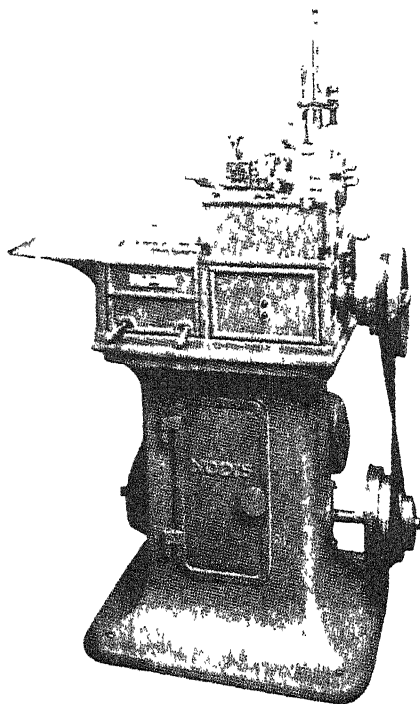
A CONTEMPORARY TYPE-CASTING MACHINE.
